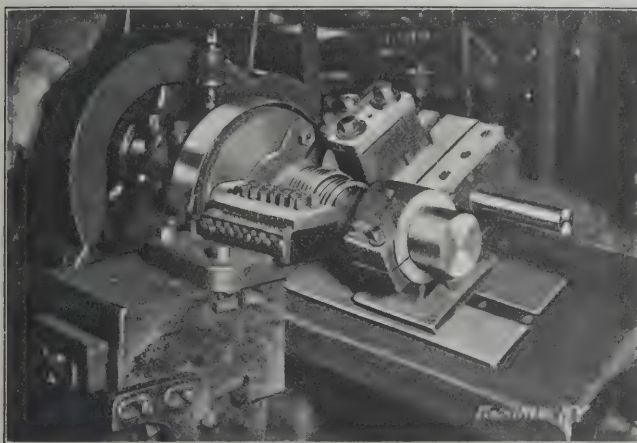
Turning, Boring and Cutting-off Piston Rings in a Gridley Machine
